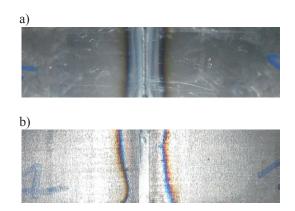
GTAW weld sample-IS (a) and 6xDRECE (b)
